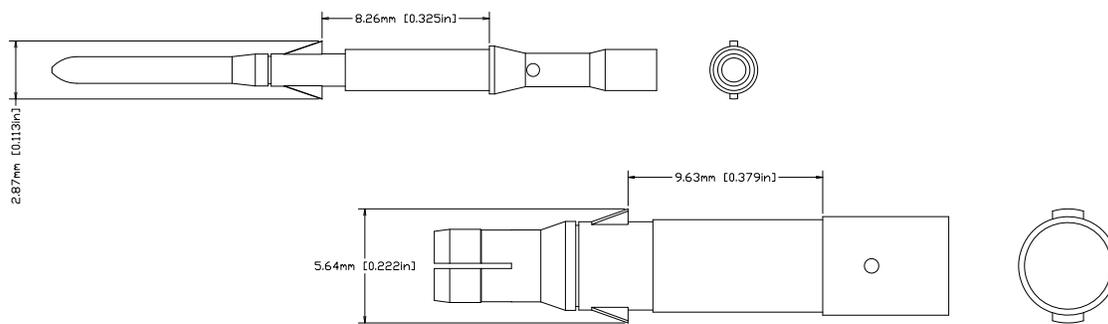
Mixed power module connector, 28-10 A/1 6-20 A position, fixture pin contact
